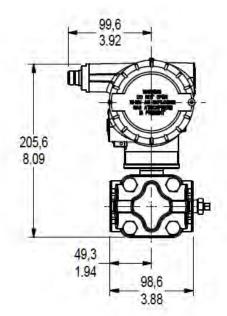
Typical mounting dimensions for STDW810, STDW820, STDW830 and STDW870 (remote antenna adaptor shown, rear view)
